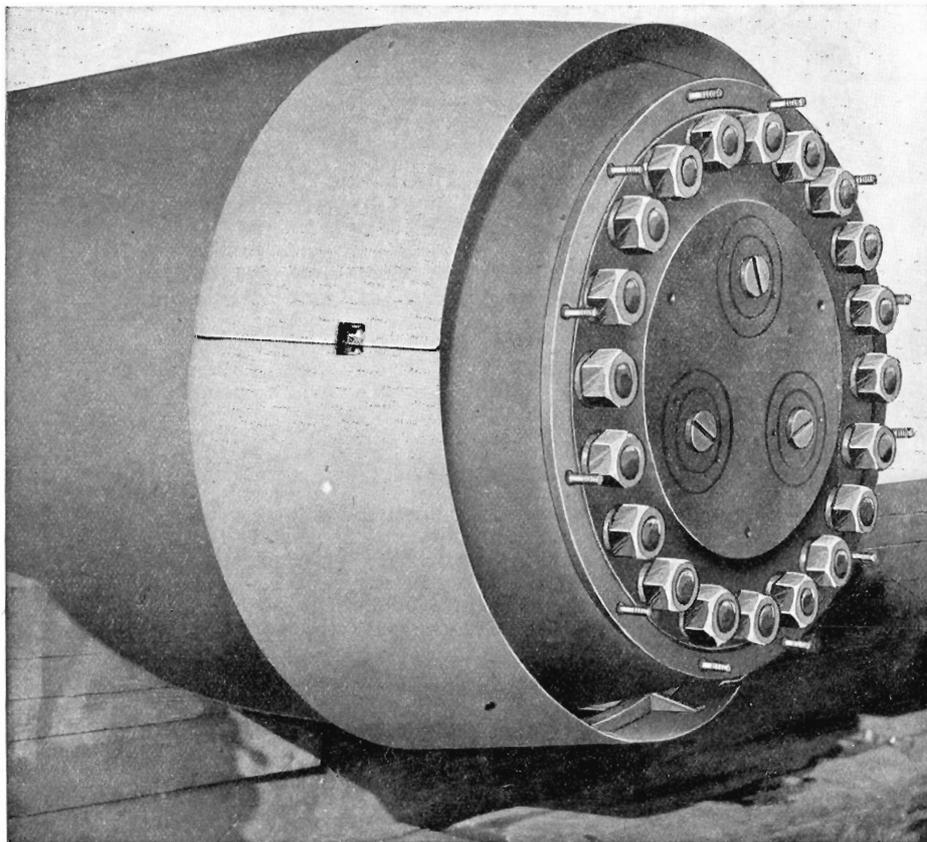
View showing fairing in position on bomb body prior to fitting tail unit
